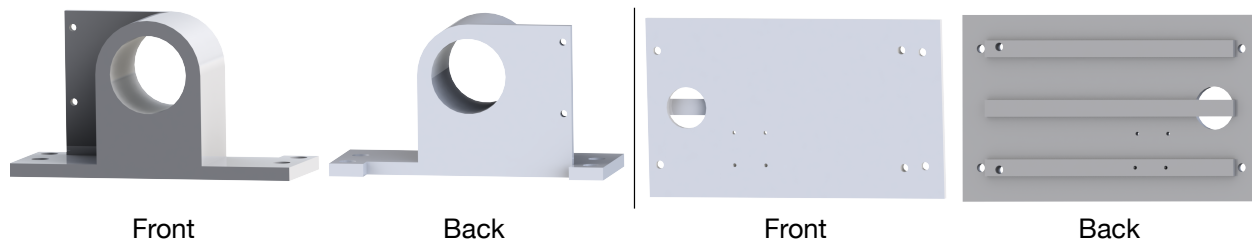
This figure illustrates the overall look of the bearing housing and cart plate. The main features on the bearing housing is the thorough hole that is used to install the bearing. To make the manufacturing process easier, a thorough hole is used and a spacer is later installed to maintain the distance of two bearings. As for the cart plate, it has simple shape and features. The four tiny threaded holes are used to install the cable management tool while the larger hole is milled to install the circular level indicator.
